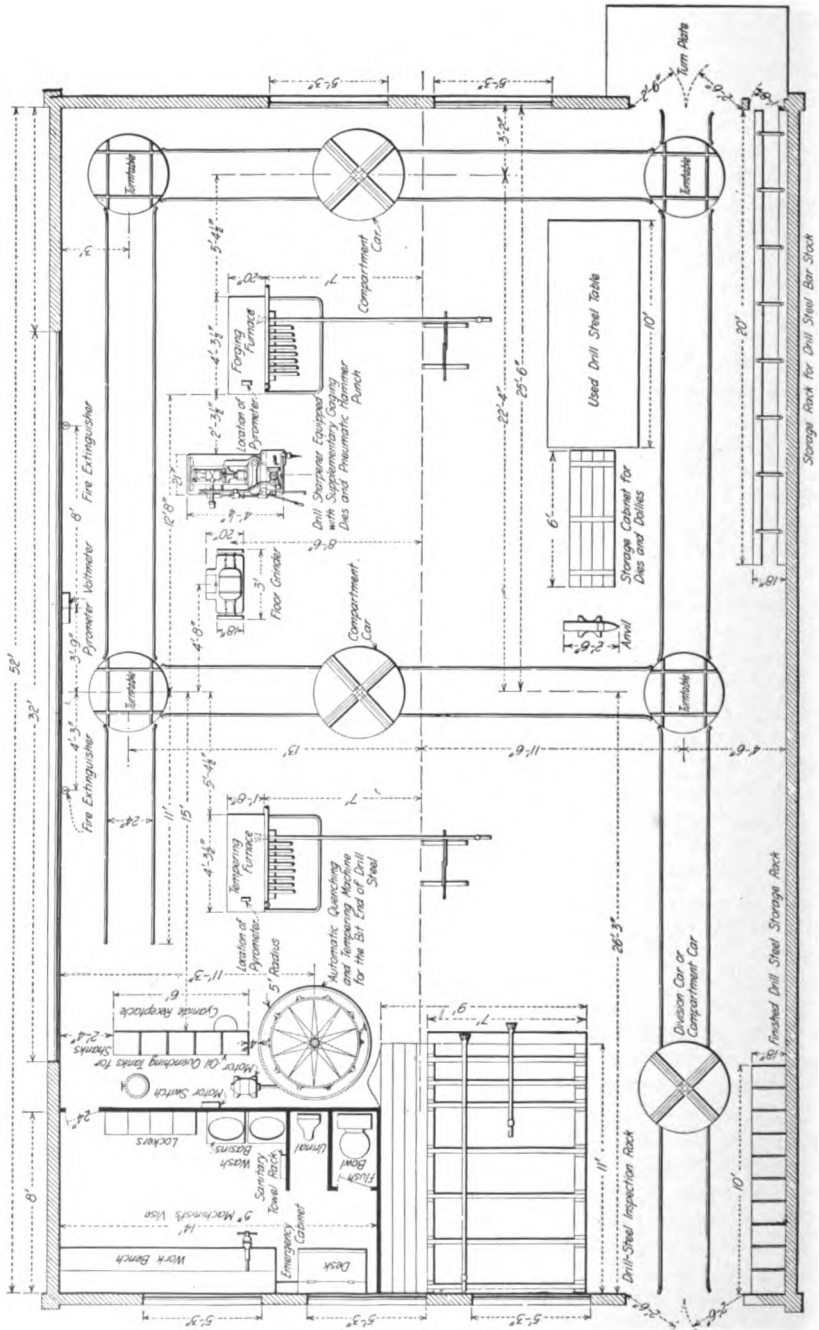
Floor Plan of Ideal Shop for Sharpening Steel
